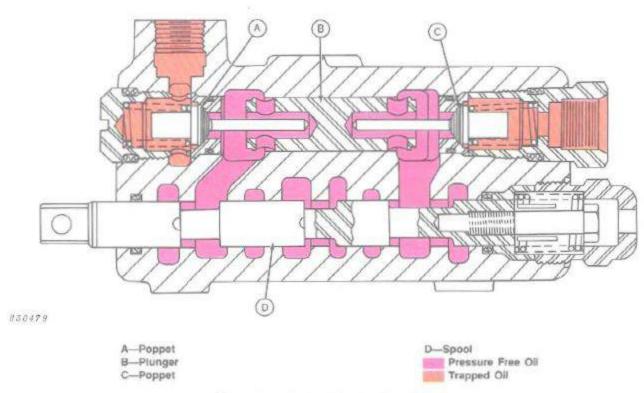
Cross-Section Unloading Auger Swing Control Valve (Neutral Position)
